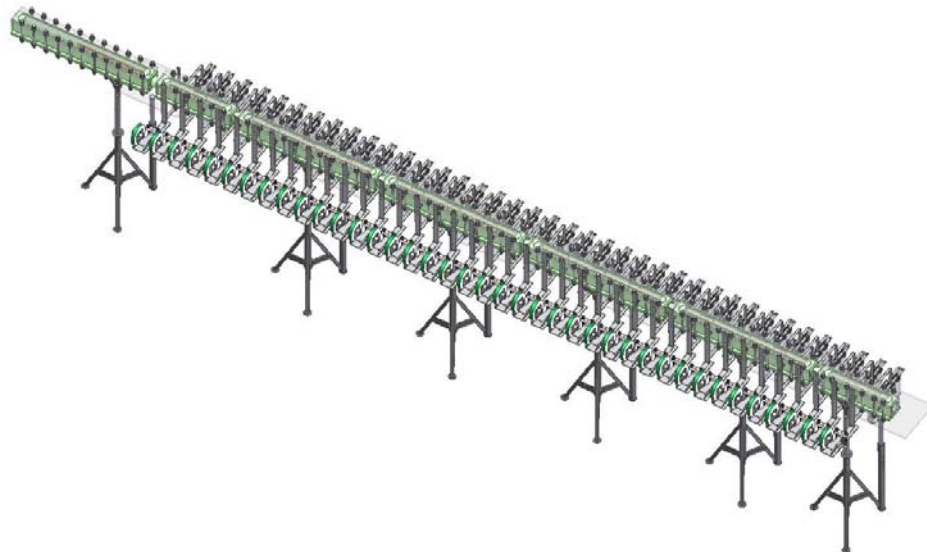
CAD drawing of a 40-stage DES launcher.
